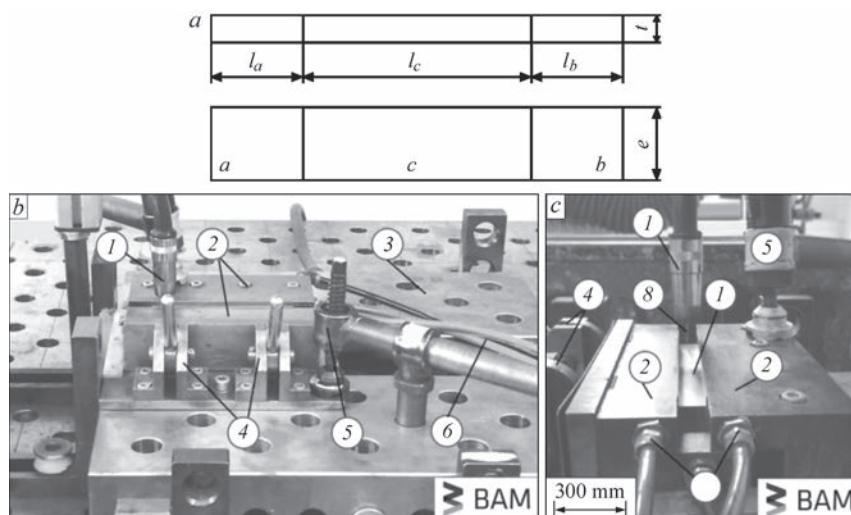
ISO 3690-welding: *a* — test sample; *b*–*c* — welding fixture, taken with permission from Springer Nature from ref. [19]: 1 — welding torch; 2 — copper clamps; 3 — fixing plate; 4 — toggle clamps; 5 — attachment; 6 — cooling water; 7 — specimen; 8 — welding consumable
